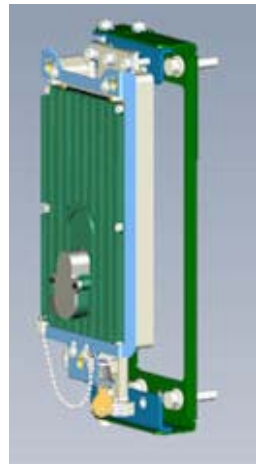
9764 Metro Dock wall mount (no tilt)
